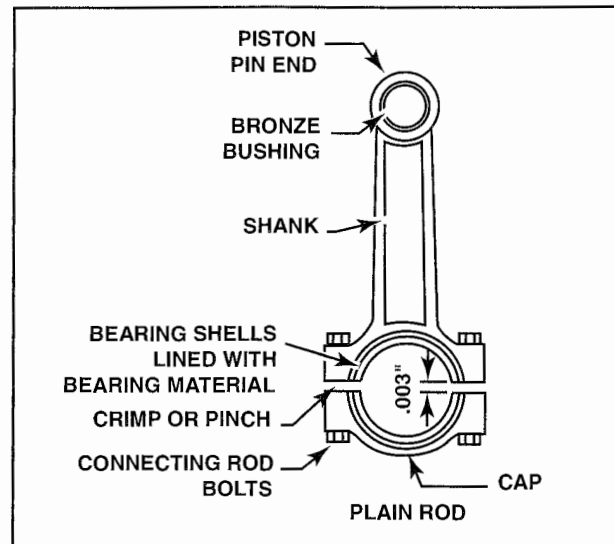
The two piece bearing shell on a typical plain connecting rod fits tightly in the crankpin end of the connecting rod. The bearing is held in place by pins or tangs that fit into slots cut into the cap and connecting rod. The piston end of the connecting rod contains a bushing that is pressed into place.
